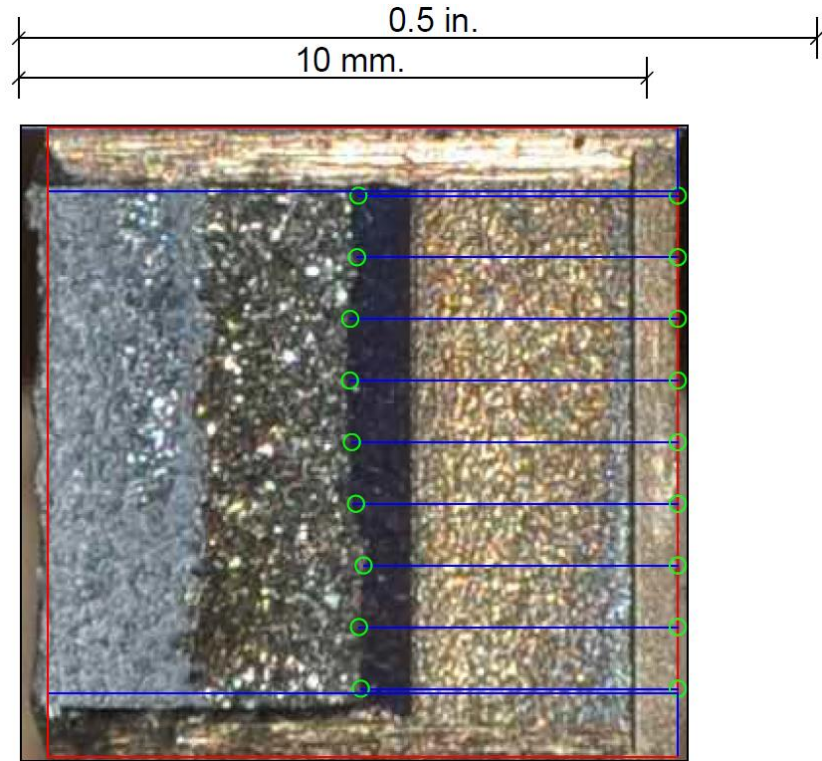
Specimen 4-17' Fracture Surface
